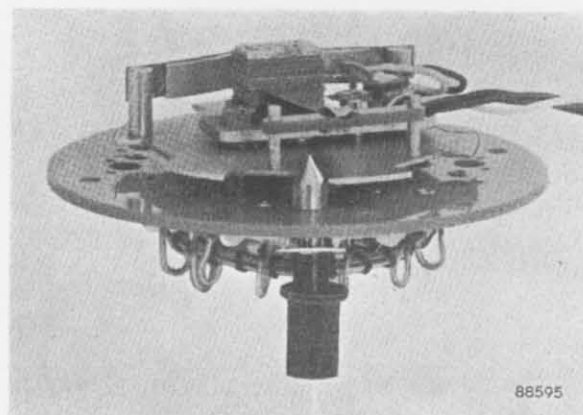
Same view as Fig. 12, but with the key plunger operated. The interlocking disk has been pushed aside and the operating spring of the start contact *vc* has been forced out of the hollow in the insulating cross-piece.
